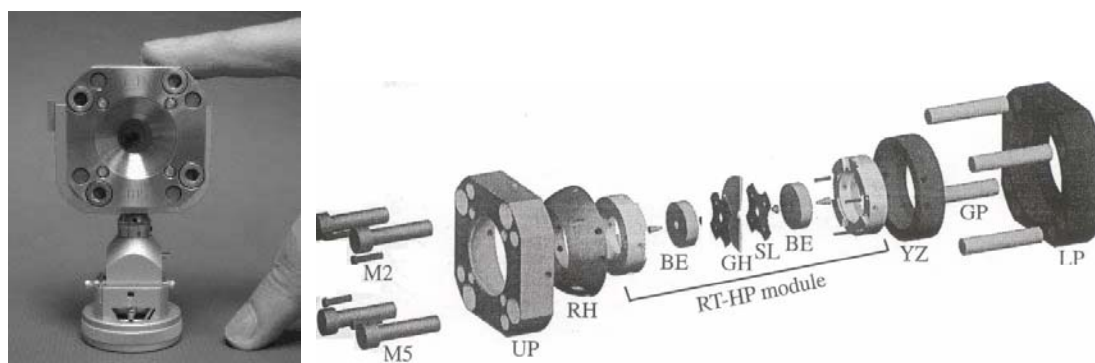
Picture and exploded view of the ETH diamond anvil cell. RT: room temperature, HP: high pressure, M2: alignment screws, M5: bolts, UP: upper platen, RH: rocking hemisphere, BE: beryllium seat, GH: gasket holder, SL: spring leaf, YZ: translation stage, GP: guide pins, LP: lower platen.¹⁵
